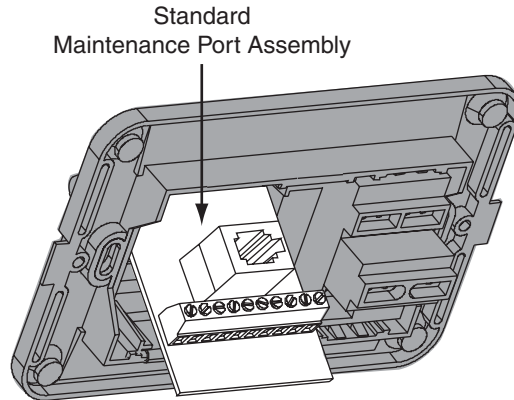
Detaching the Standard Maintenance Port Assembly
